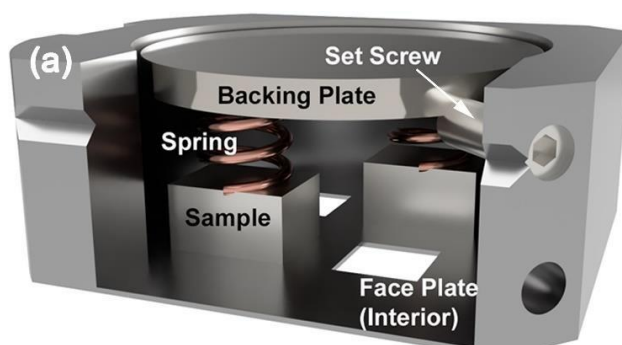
Loaded CAMECA 7f Geo sample holder. Samples are placed into position shown and held in place by compressing copper springs between the sample and the backing plate. The force applied can cause deflection of the faceplate resulting in an
